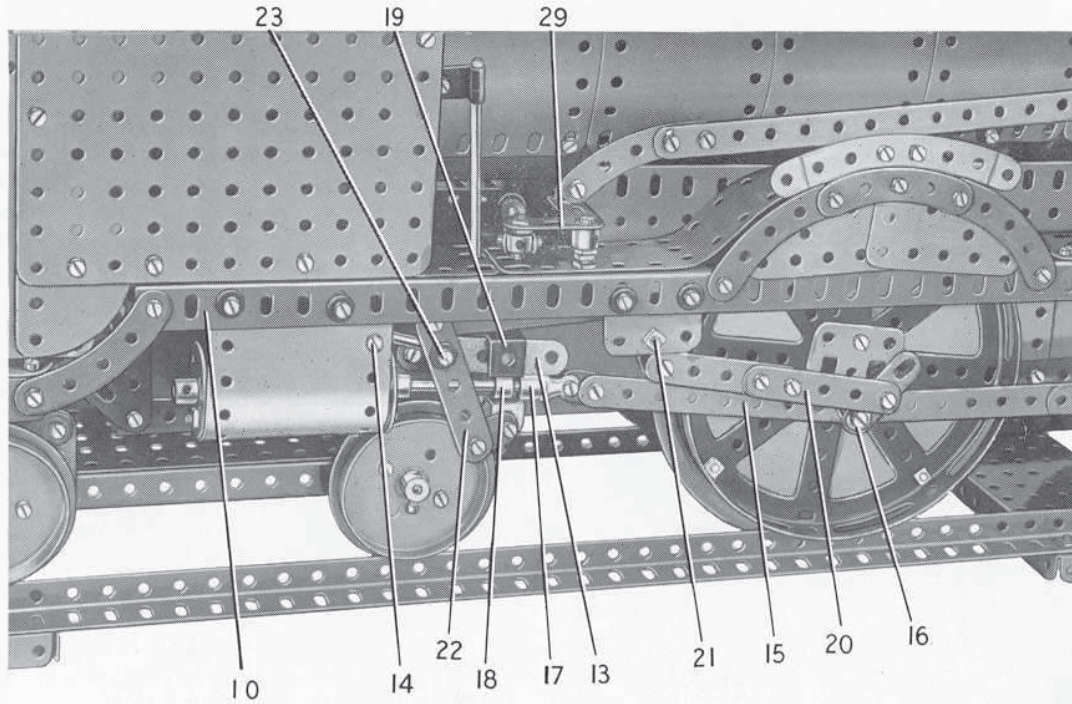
A close-up picture of the valve motion and cylinder assembly
